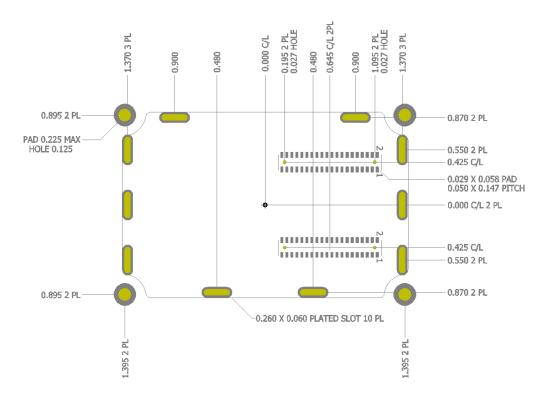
Dual-Axis PCBA Footprint w/ Mating Connectors
